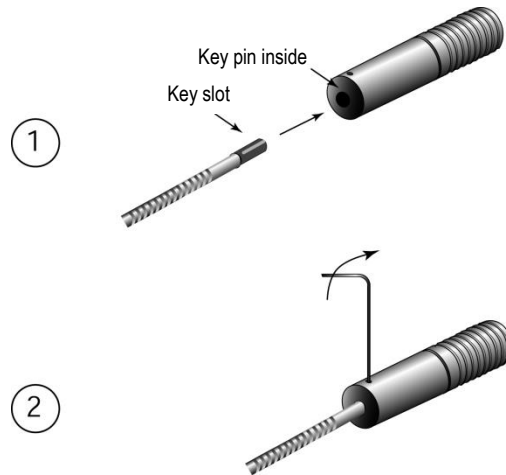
Attaching the Fiber optic Cable to the Optical Head
